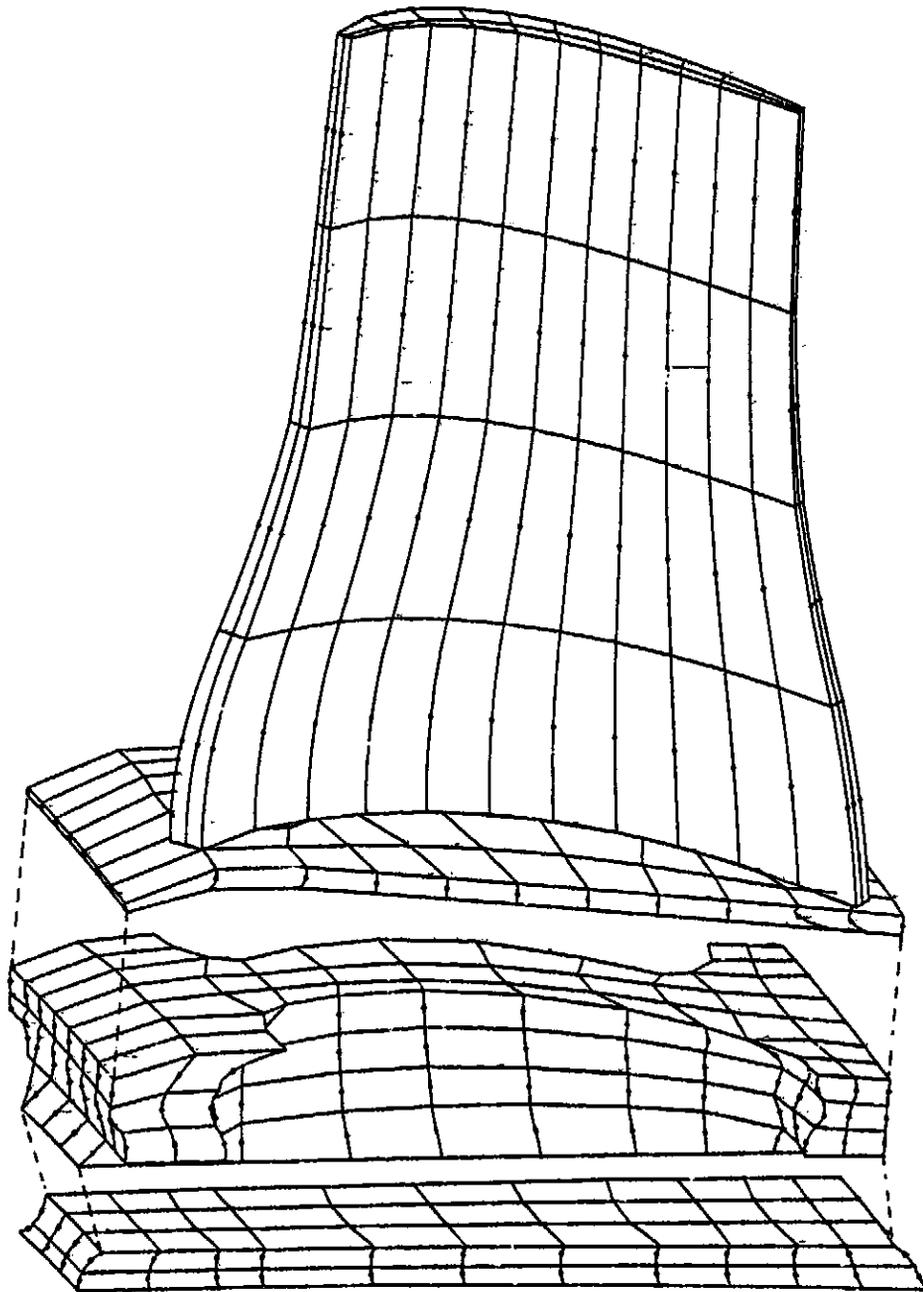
Final Blade Design -- Airfoil, Platform, and Shank
